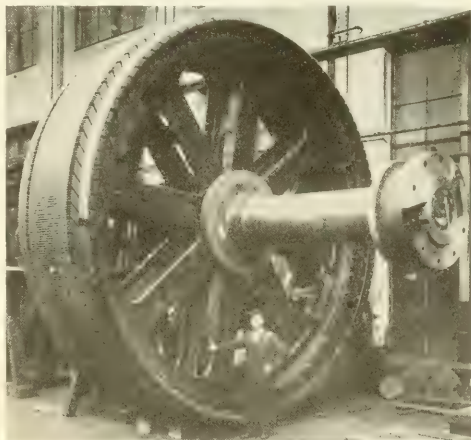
ROTOR FOR 6000 HP, 86 R.P.M. MOTOR
